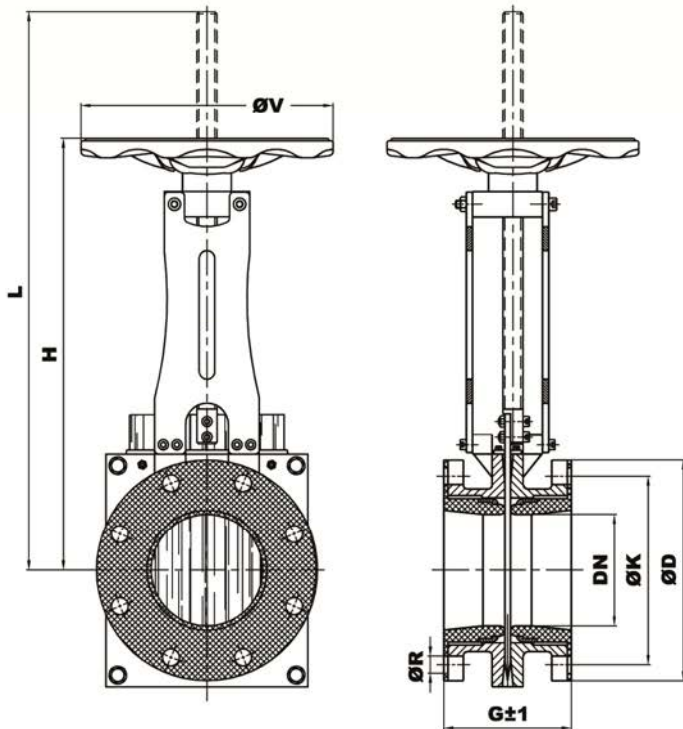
KGV-SL fully lugged rising stem with handwheel & gearbox
